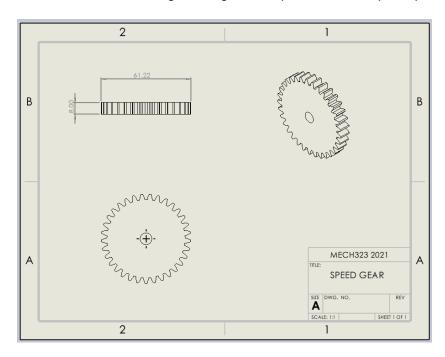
CAD drawing of the gear component of the speed gear pairing.
